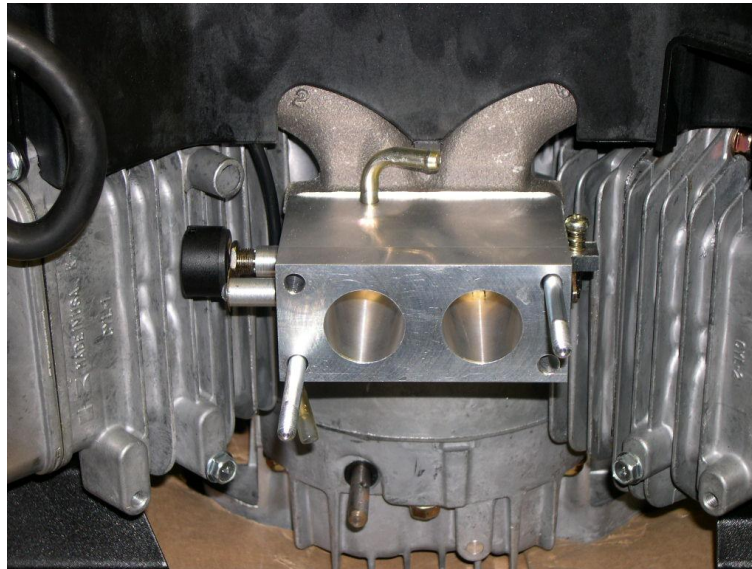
Throttle Body and Throttle Position Sensor as installed on the engine
